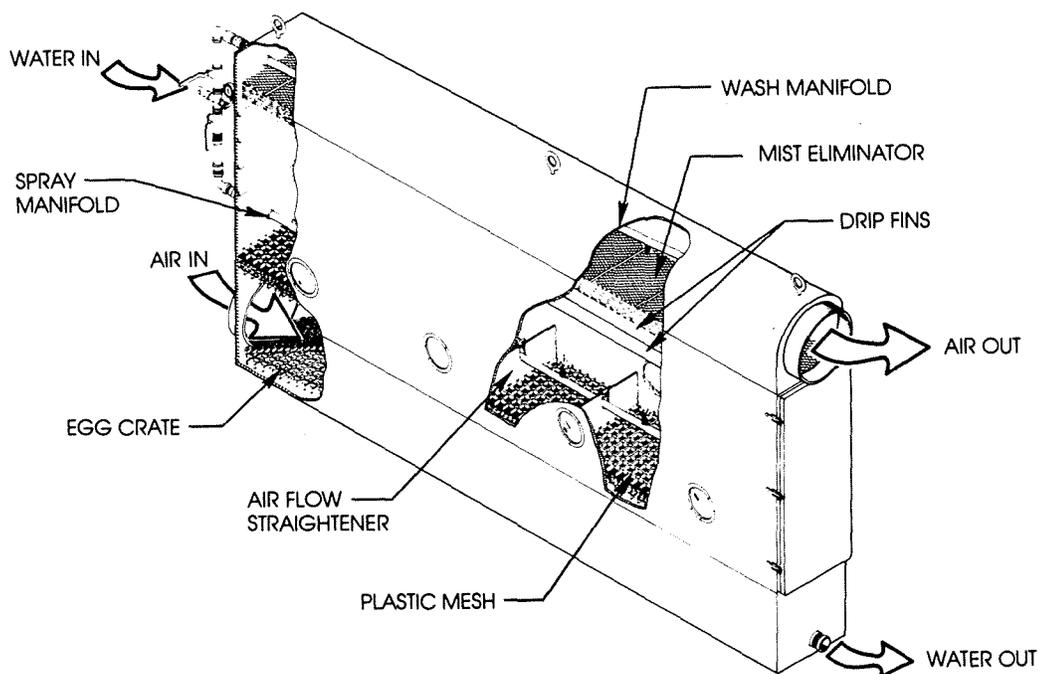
Redesigned spray cooler-galvanized steel (120- by 16- by 66-in).
